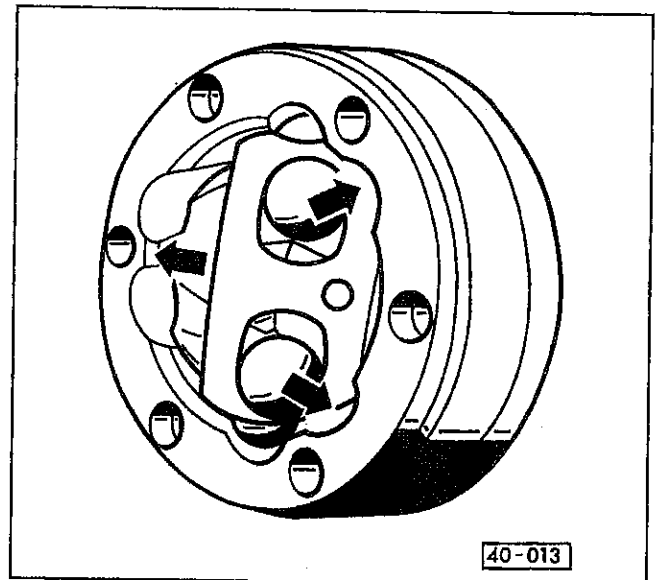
Ball hub correctly installed into housing. Pivot hub out of cage (arrows) until balls are spaced to fit grooves.
